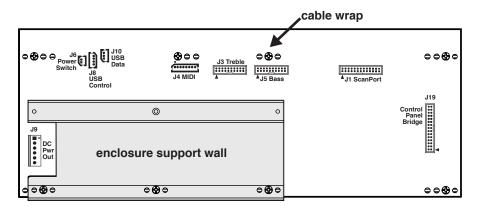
SP5-8 Right Front Panel PCB hardware locations
